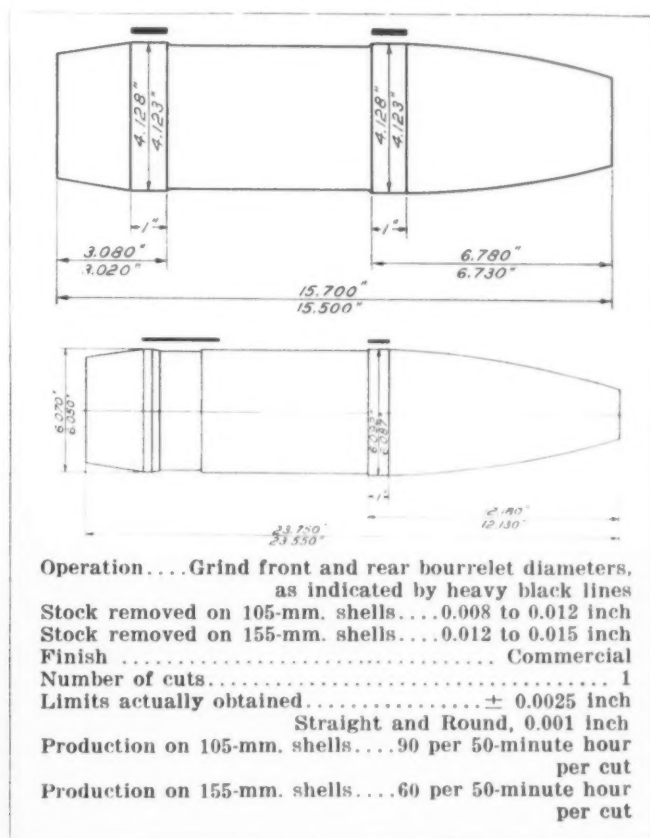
Data on Finishing Front and Rear Bourrelets of 105- and 155-millimeter Shells
